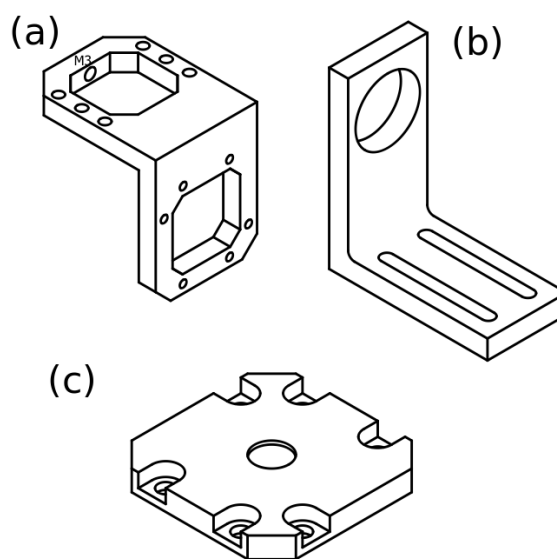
CAD designed positioning parts. (a) L-bracket that attaches on top of the attocube stack and allows the diamond samples to be mounted vertically. (b) Objective mount that uses the two long horizontal holes to screw into the base of the cryostat as if it were part of the optics table. (c) Sample mount which holds the diamond samples in the shallow circular depression and screws into the L-bracket with a thermal link to the cryostat cold finger in between.
